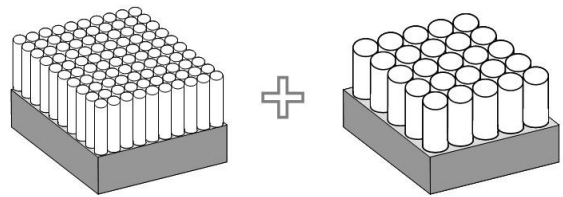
Concept of sectional flexible die forming using different punch blocks
